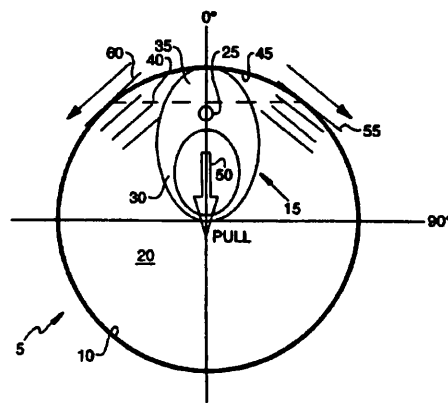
Plan View of Wilson's Full Aperture Easy Open End
